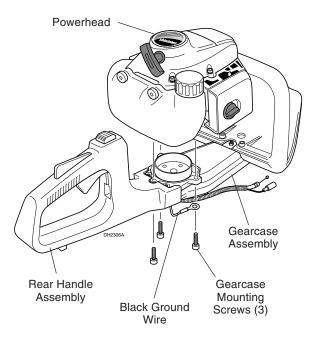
Removing the Powerhead Assembly from the Gearcase Assembly
